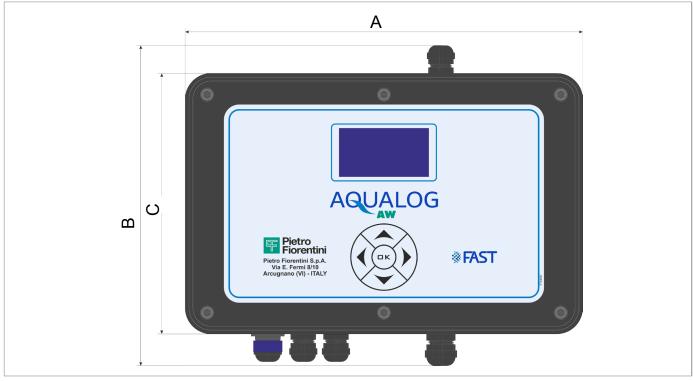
Dimensions AQUALOG AW cable version, front view
